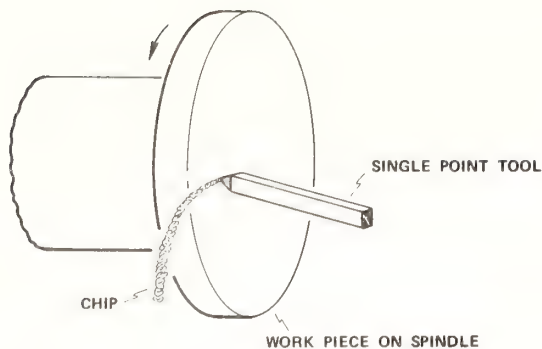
Schematic diagram of the basic single-point machining process showing chip formation by a single-point tool as in machining a ductile material.
